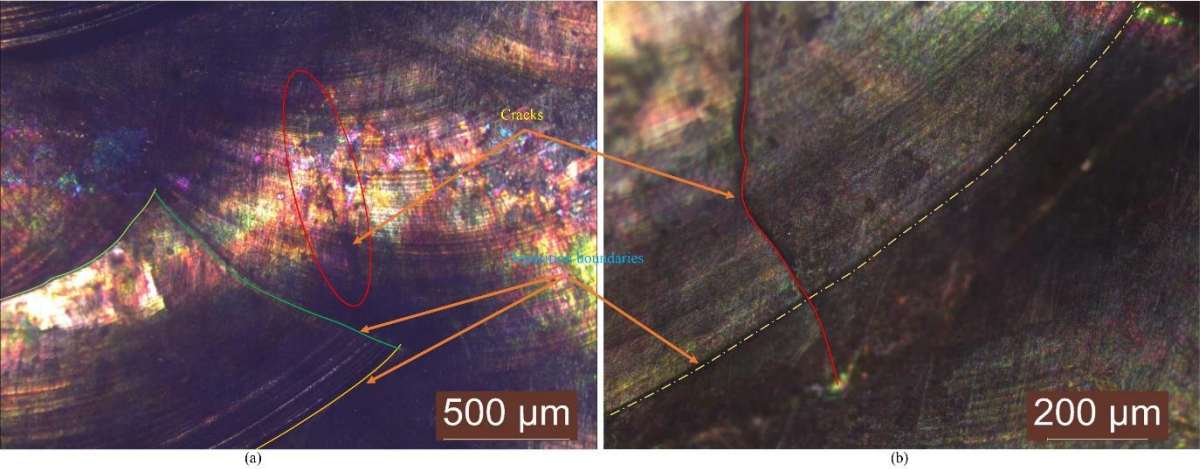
(a) microscopic image of additively manufactured Ti6Al4V surface after polishing, and (b) cracks on the polished surface.
